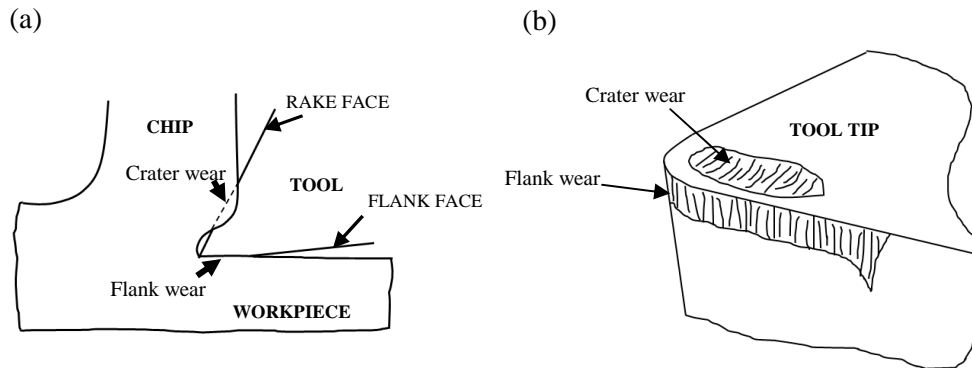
(a) Tool-workpiece interaction, and (b) location of crater wear and flank wear (Özel & Davim, 2009)
